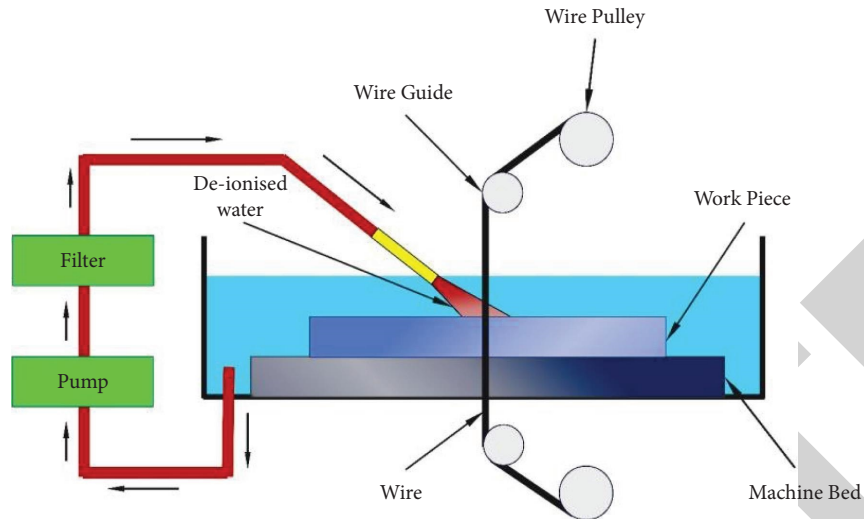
Schematic view of wire cut electrical discharge machine.
